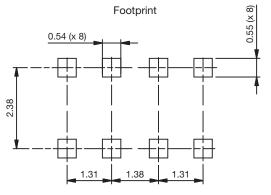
Issue: 1; 20.04.2018
